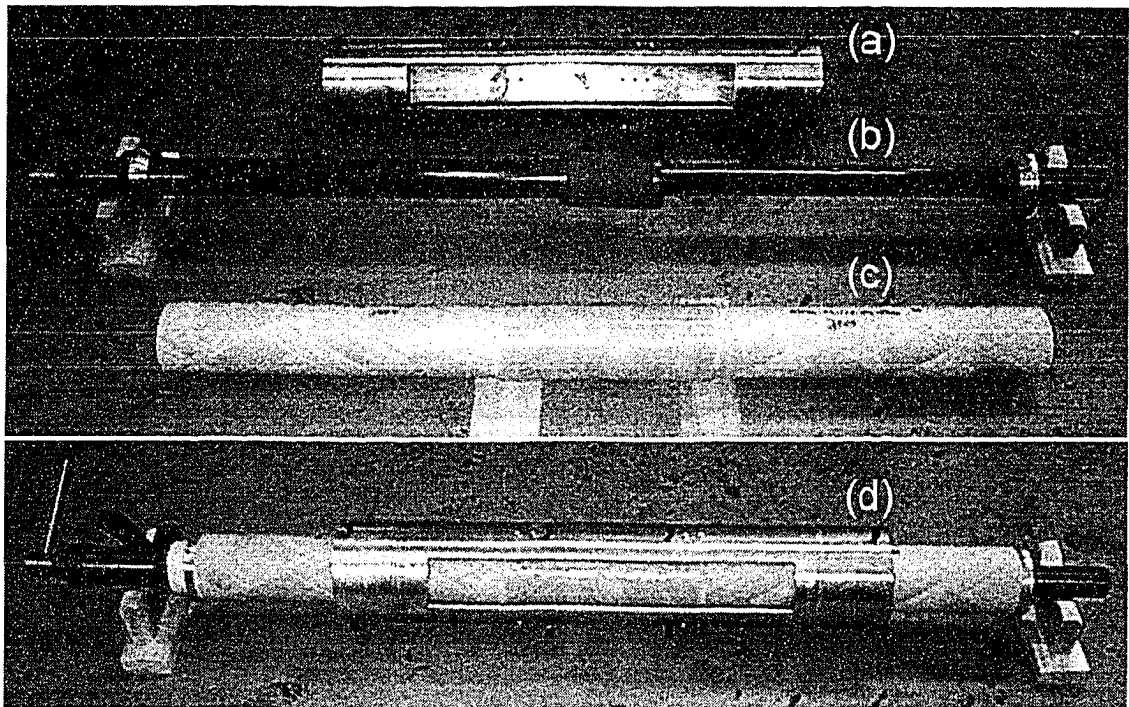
Pipe alignment device: (a) coupler cage, (b) expandable mandrel with support structure, (c) coupled prototype pipe, and (d) pipe alignment device assembly.
